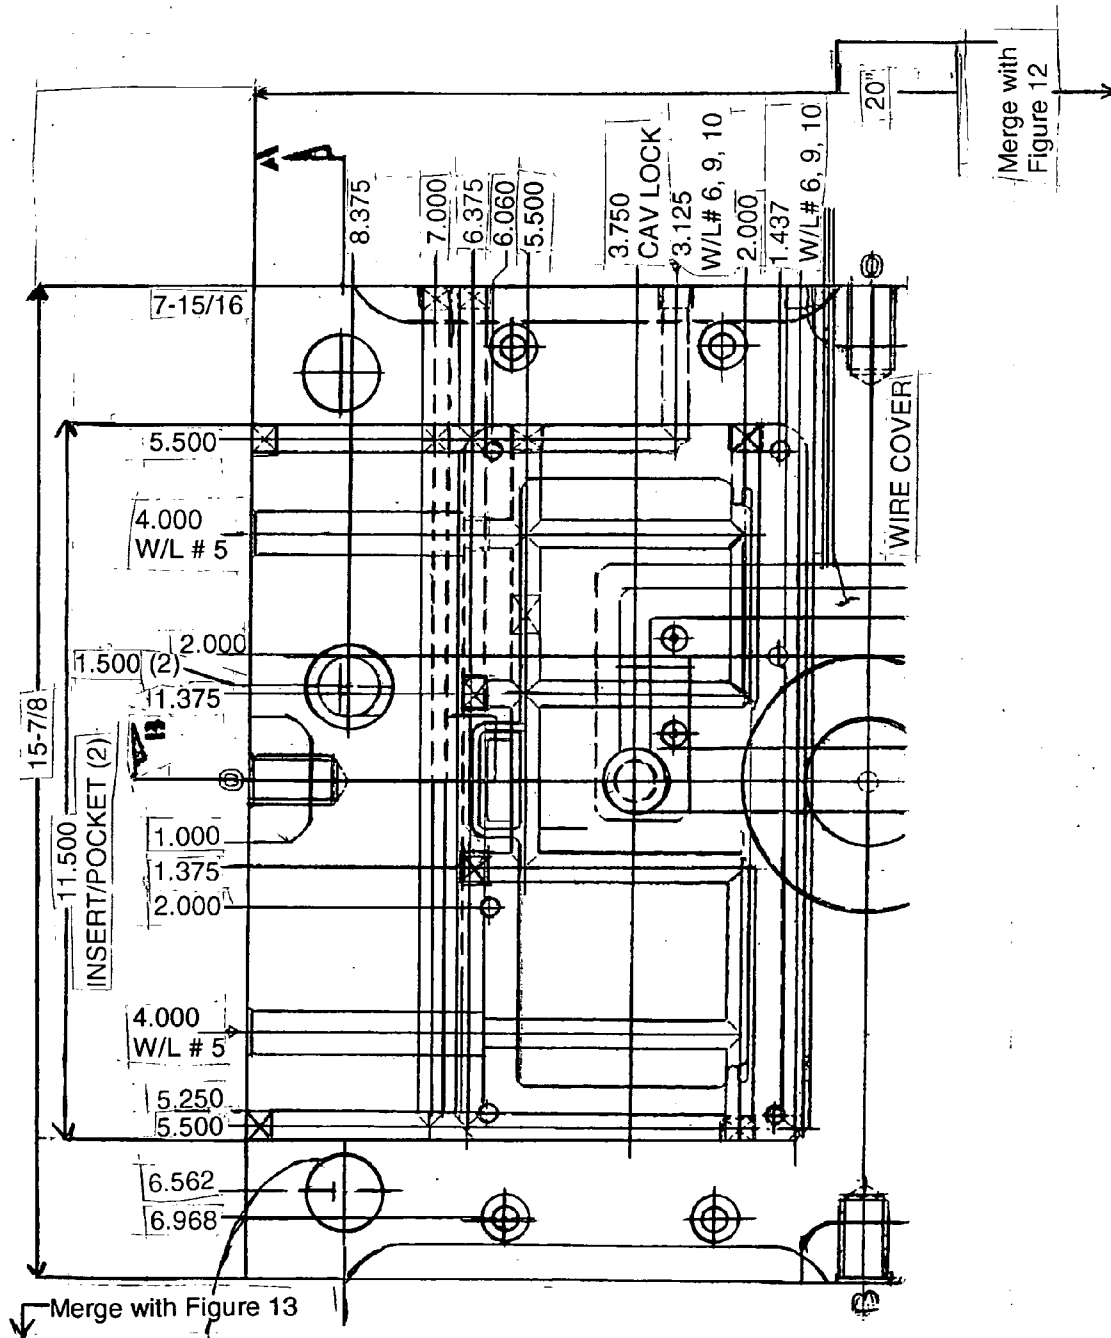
Plan Views – Two Cavity Injection Molds for Top and Bottom Housing, Page 2 of 2, Hot Half
